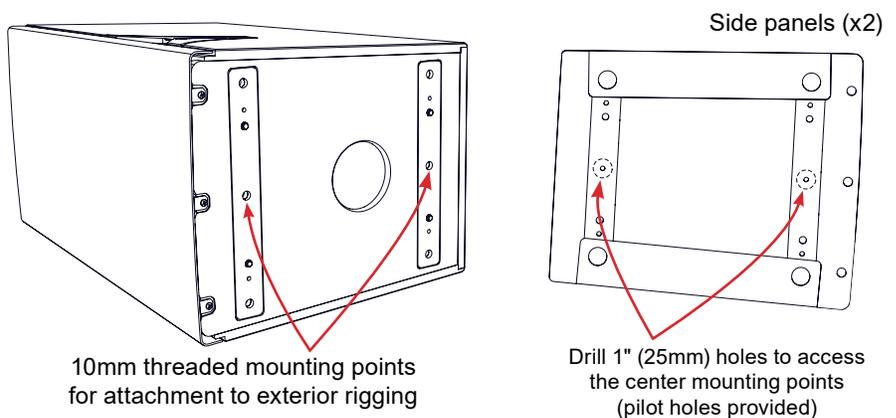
The side panels must be drilled at each center mounting point on IV6-WR cabinets for attachment to customized external rigging.
